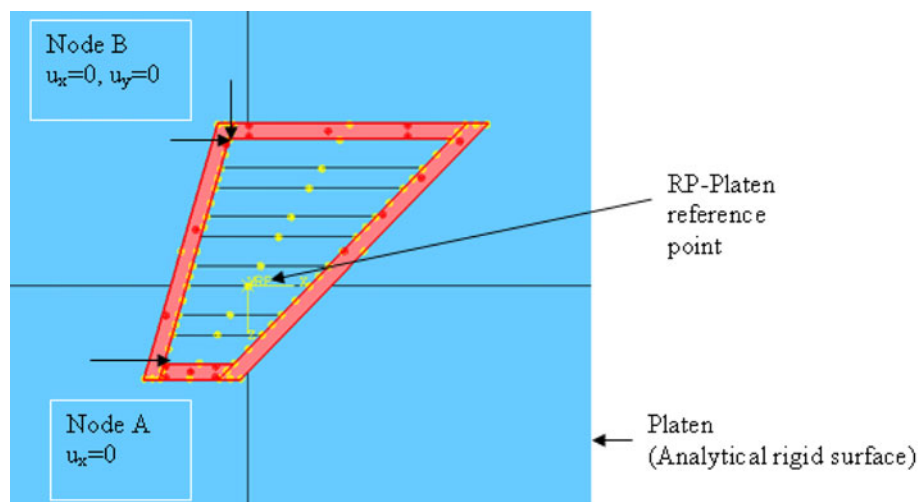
Mechanical boundary conditions and clamping pressure for FE model of SPF tool and platen
